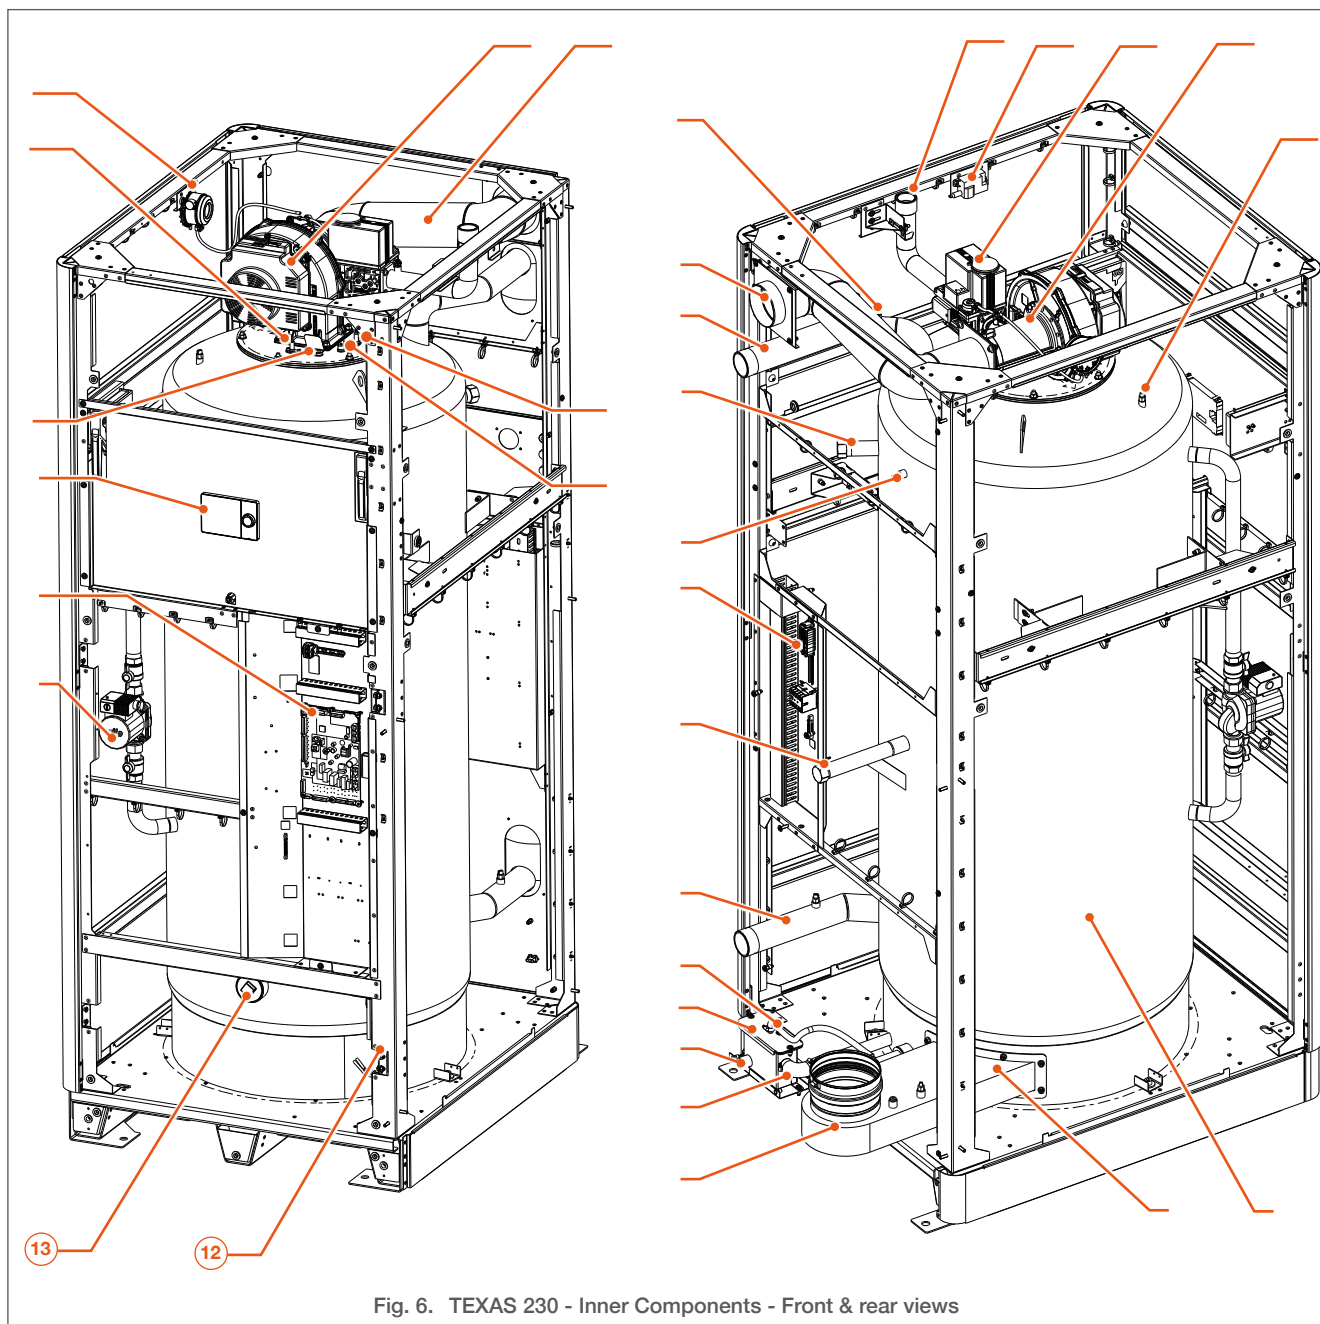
TEXAS 230 - Inner Components - Front & rear views
